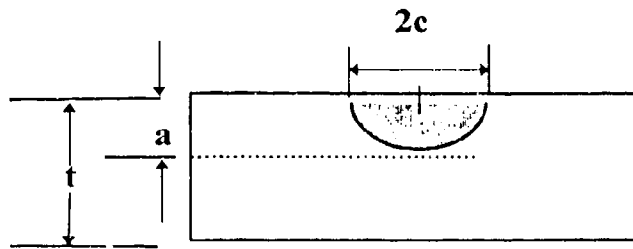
Cross section view of a part containing a surface (thumb-nail) crack
